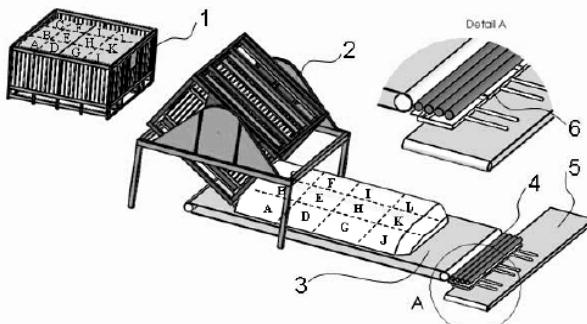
Box filled in layers by displacing the box (1) and filling belt (2), increasing the height of the filling belt (3), reversible conveyor device (4), adjustable angle of inclination (5)
